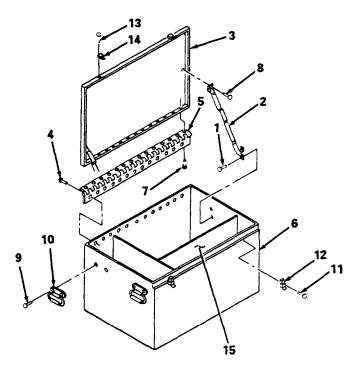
Flow Control Kit Chest Assembly, Repair.
